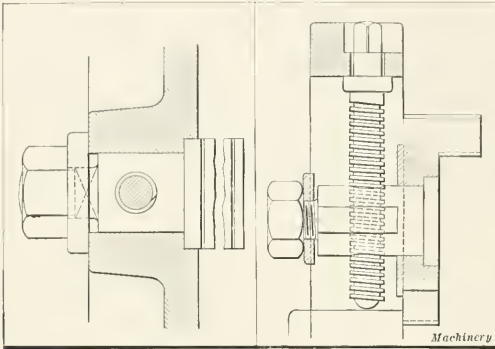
Jaw recessed slightly into Plate Fig. 13. Reversible Jaw swiveling on Stud
